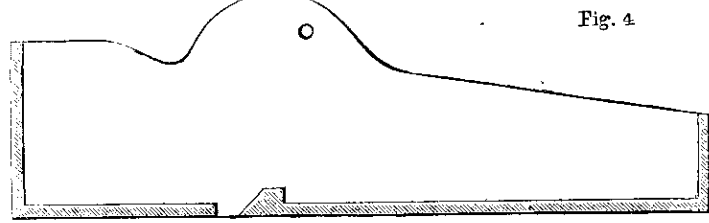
Casting for Iron Smoothing Plane: Section. Fig. 4 A.—Ditto: Plan.
